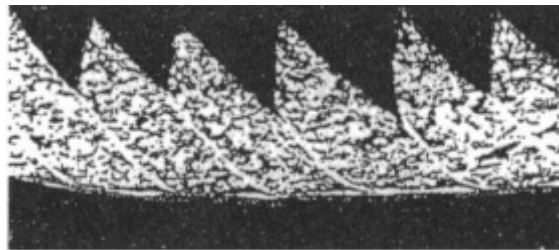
25 Photograph of the saw-tooth chip [52].
